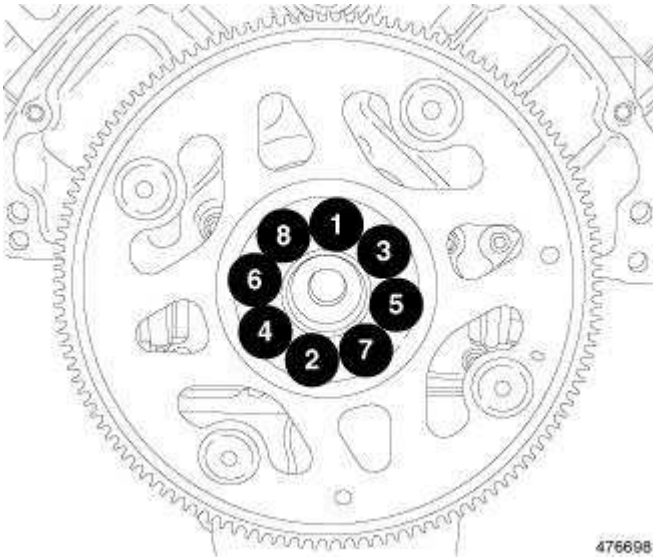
Flexplate Retaining Bolt Removal & Tightening Sequence
